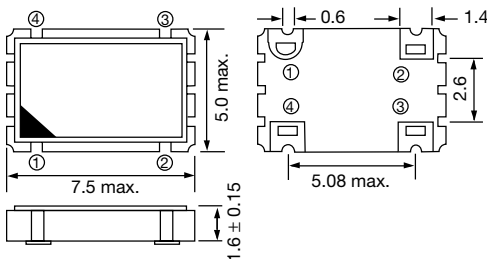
ECS-3955M Series Top, Side and Bottom Views
